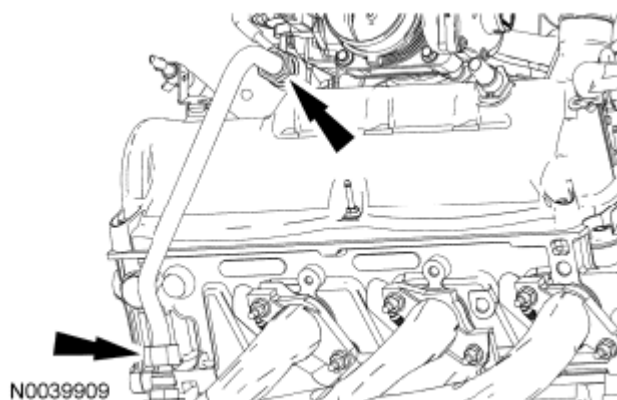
Locating Exhaust Manifold-To-EGR System Module Tube
